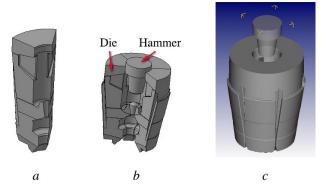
Models of the equipment: *a*) section of the die; *b*) die in assembled form; *c*) die with the sections joined together into one unit (for modeling in the program DEFORM-3D).
